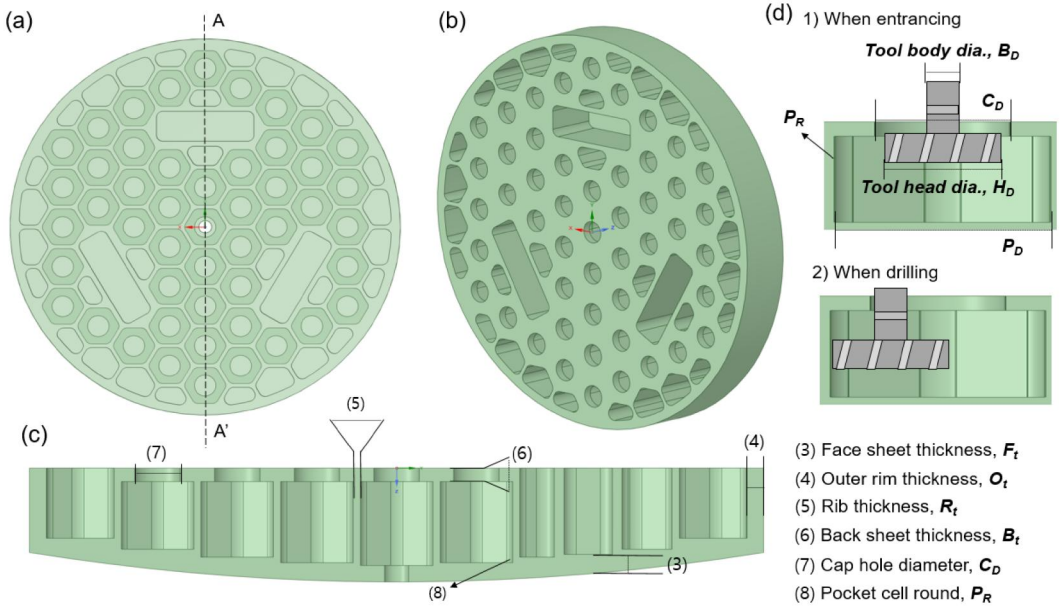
Lightweight mirror design. (a) Front view, (b) Isometric view, (c) Section view (A-A'). (d) The design requirements for the T-shaped milling tool when entrancing and drilling. The back sheet plate is introduced in the size optimization process. The design variables are the face sheet plate thickness (F_t), outer rim thickness (O_t), rib thickness (R_t), back sheet plate thickness (B_t), cap hole diameter (C_D), and pocket cell round (P_R). B_D and H_D denote the diameters of the T-shaped tool body and head, respectively.
